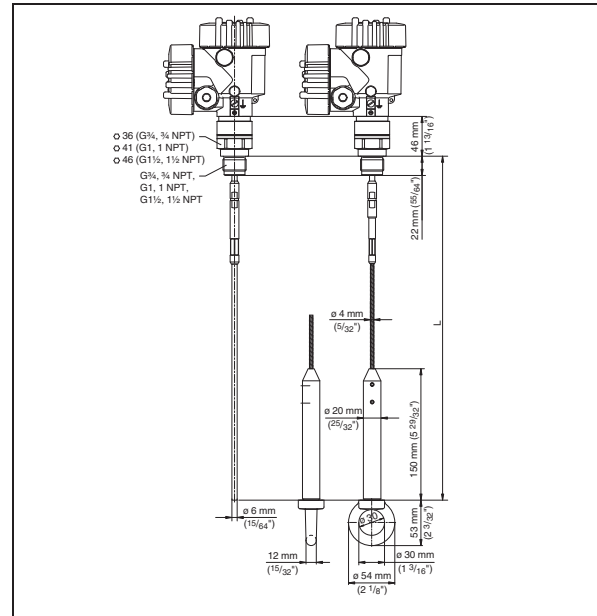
VEGAFLEX 61 in cable and rod version with thread (double chamber housing)
